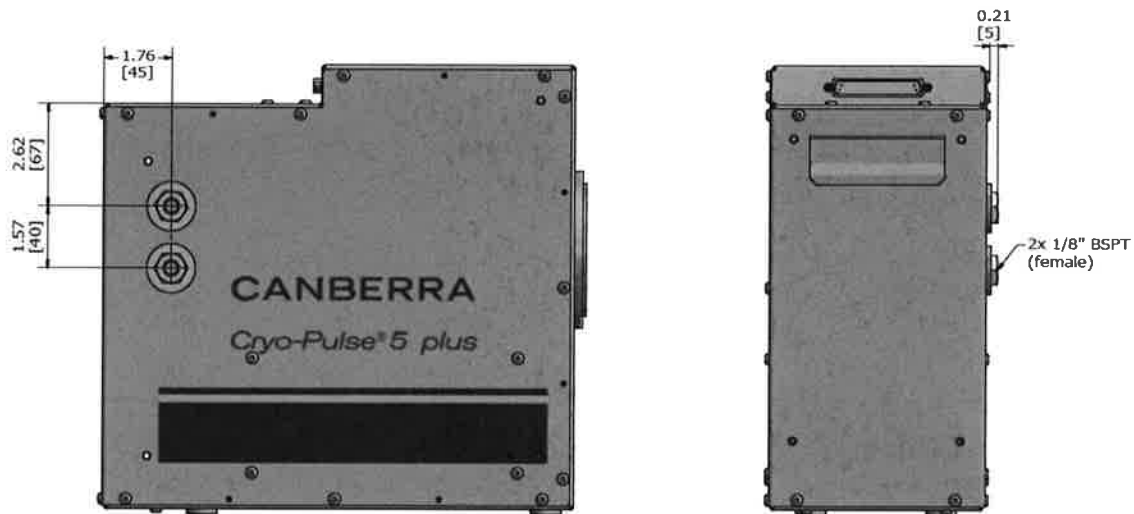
Position of the coolant in- and outlet on the CP5-plus coldhead
